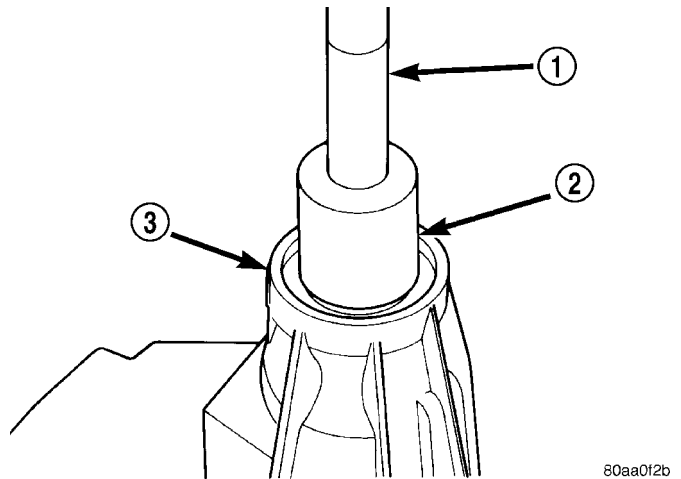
EXTENSION HOUSING AND SEAL (4X2)
